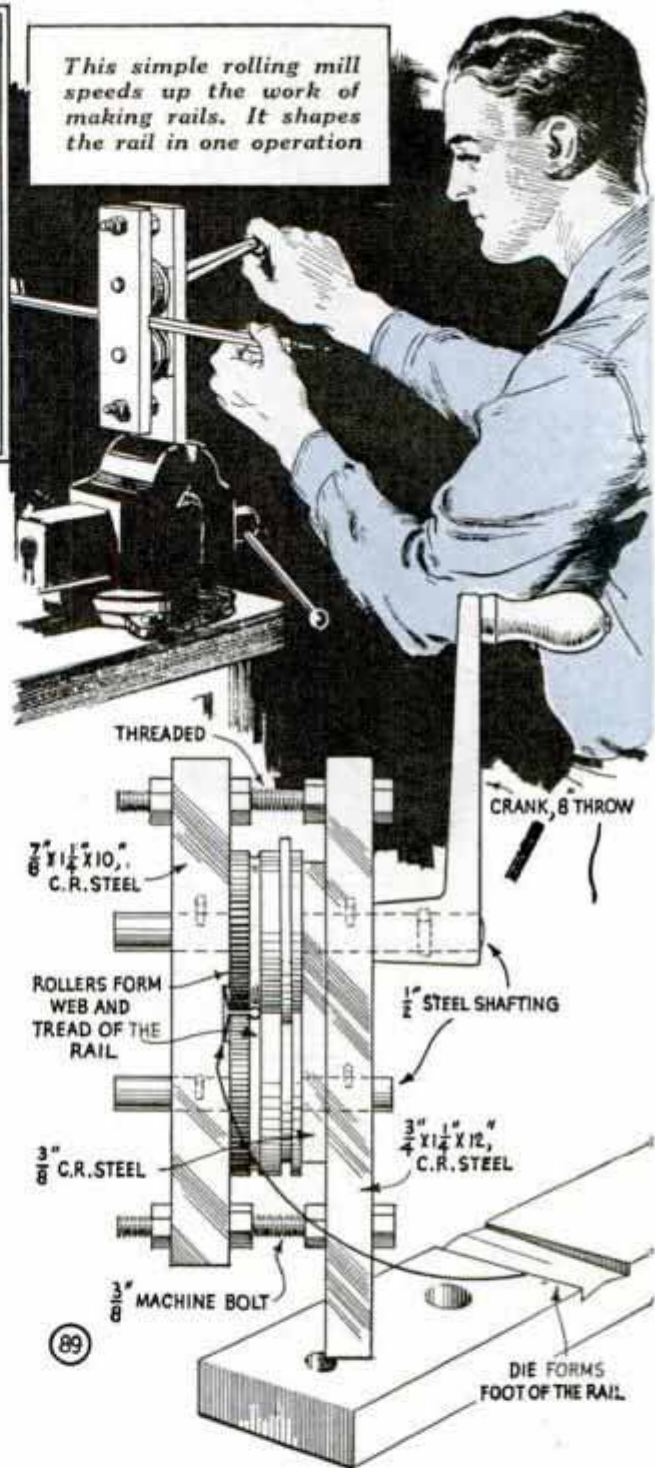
and 89 turn up another device for making rails. Here the strip is rolled instead of being drawn to shape. To build this rolling mill you will have to have some machine work done. Fig. 88 gives
